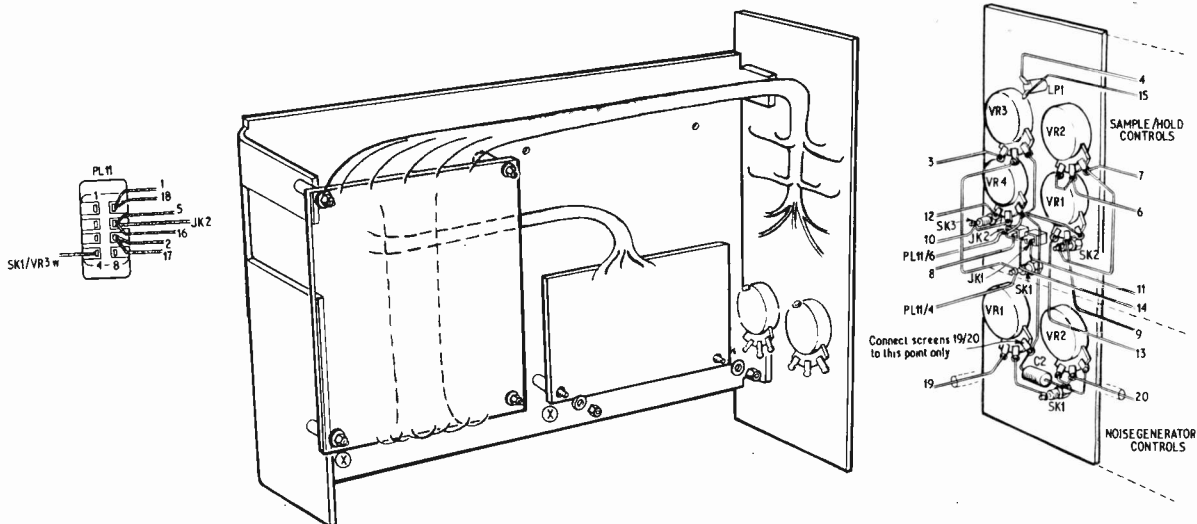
Front panel component assembly with details of mounting and disposition of board on the module support plate. The small ringed X on the board edges indicates orientation. (See board assembly figures) For direct programming from the v.c.o. module connect SK11/4 to SK8/2
